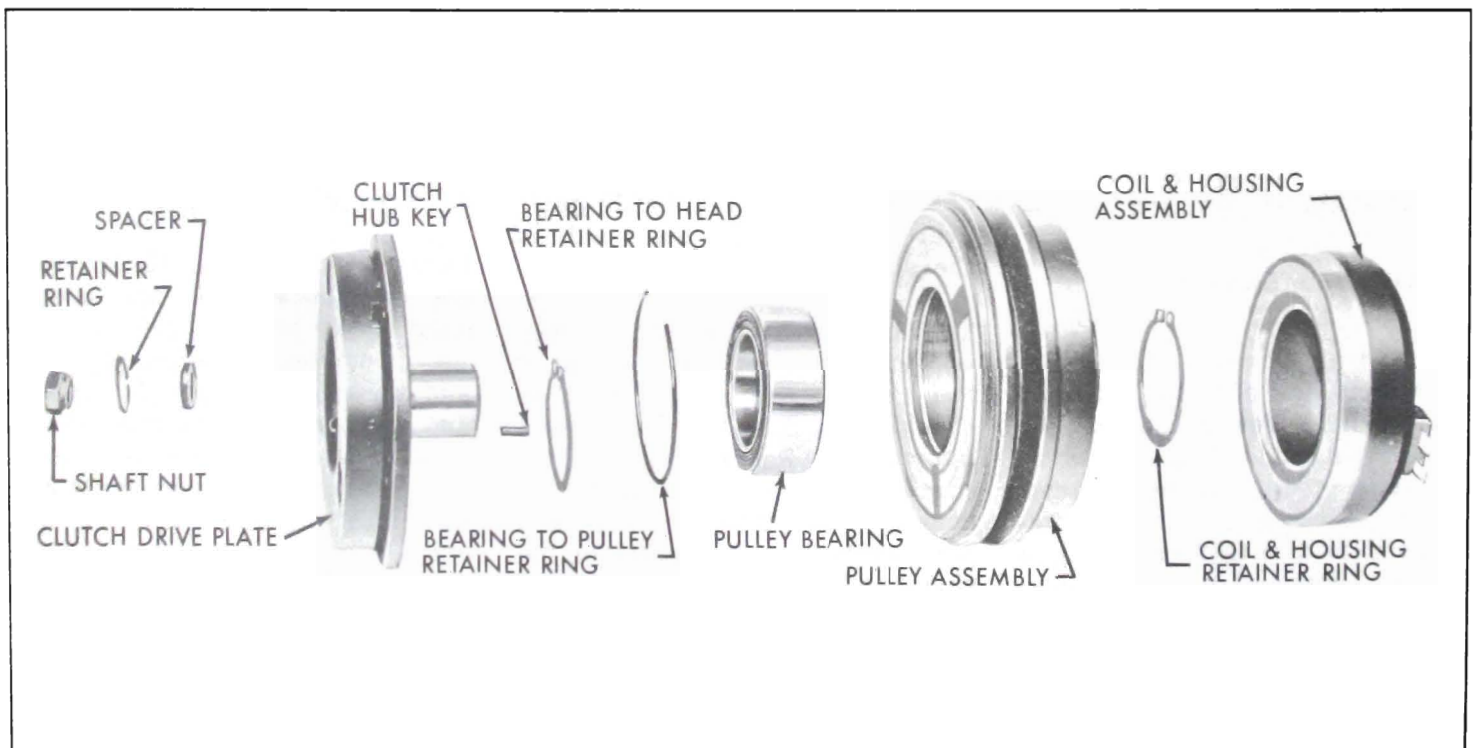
Compressor Magnetic Clutch Assembly - 4400 Series
